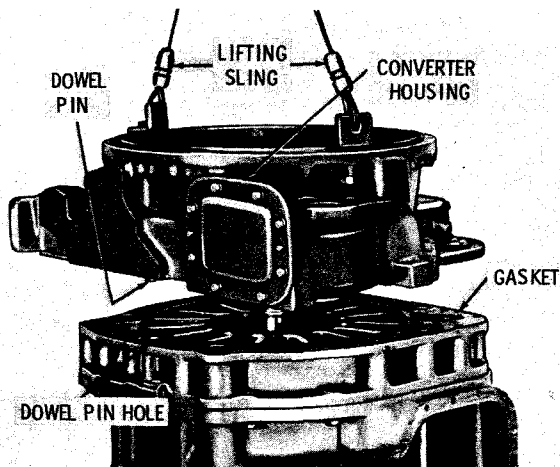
Installing converter housing onto retarder housing (CBT, CLBT, VCLBT)
